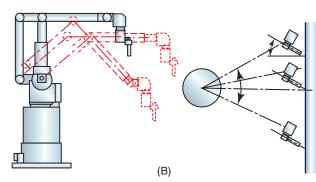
Typical GTAW automatic welding program.
